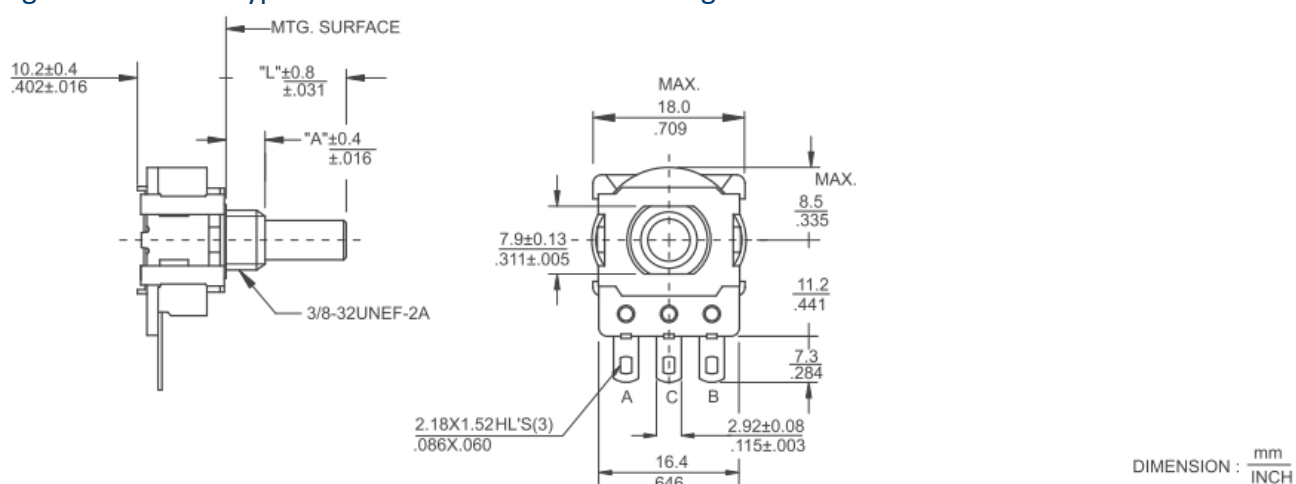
288V – Typical 2-bit Perpendicular to P.C. Board
